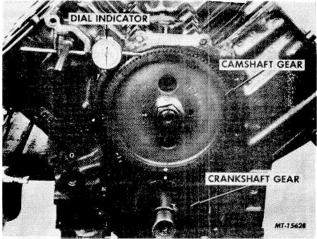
Checking Camshaft and Crankshaft Gear Backlash
